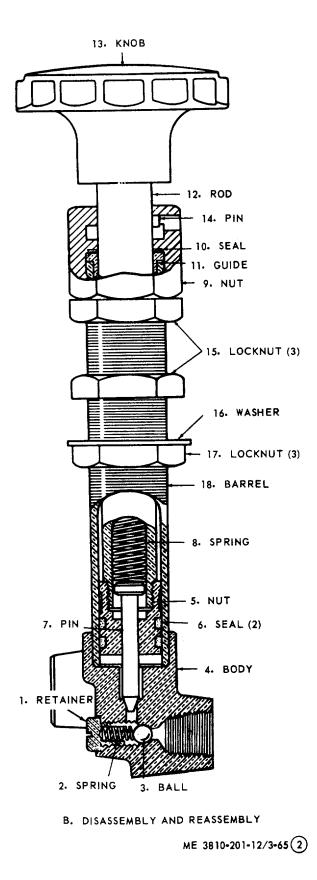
Primer pump (for engine Model D333TA) removal, disassembly, reassembly and installation (sheet 2 of 2).
